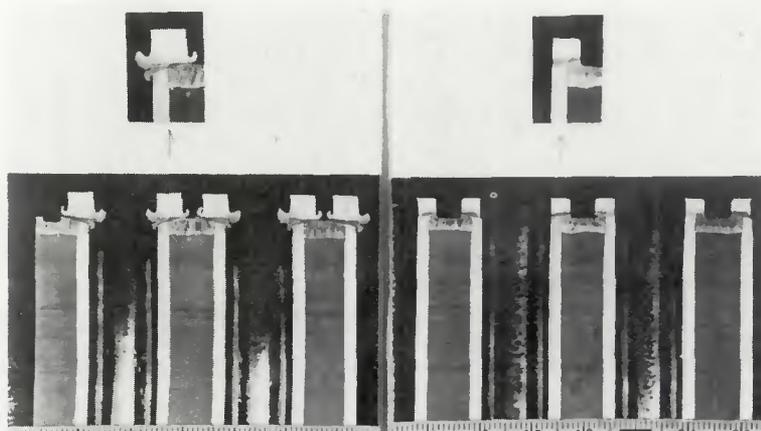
Tube to tubesheet welding of FBR using weld forming (Ref. 3): (a) as welded; (b) after finishing
